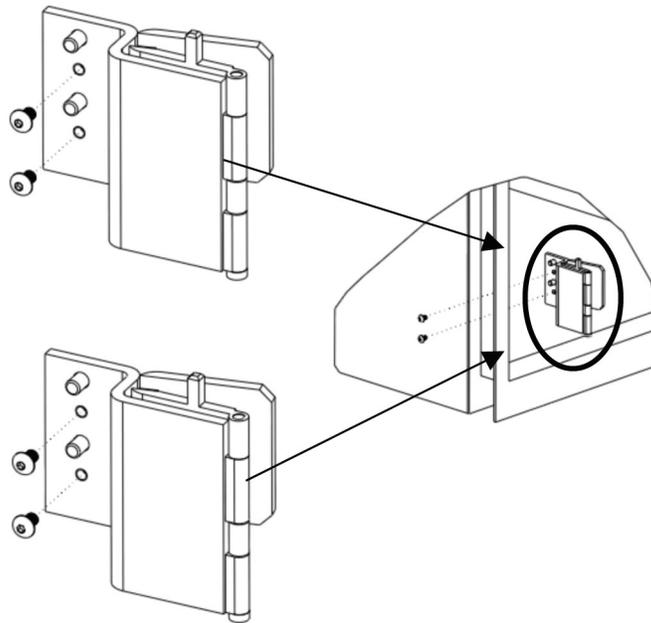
Installing the HTD hinges on the IT enclosure rear frame.
